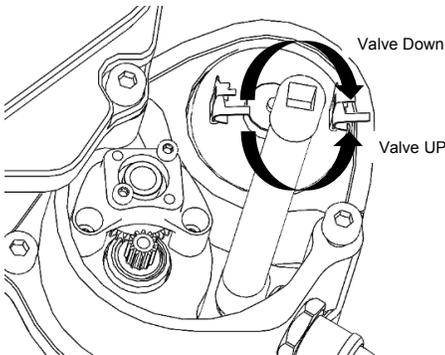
1/4 Drive extension with 5mm socket manually adjusting.
